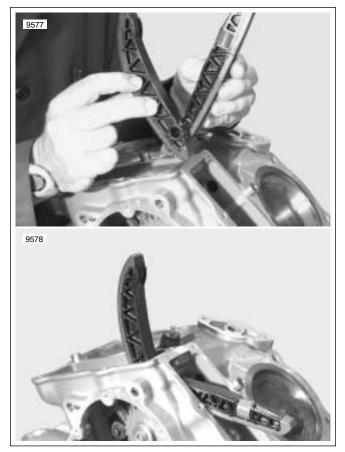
Front Hydraulic and Rear Fixed Cam Chain Tensioner
